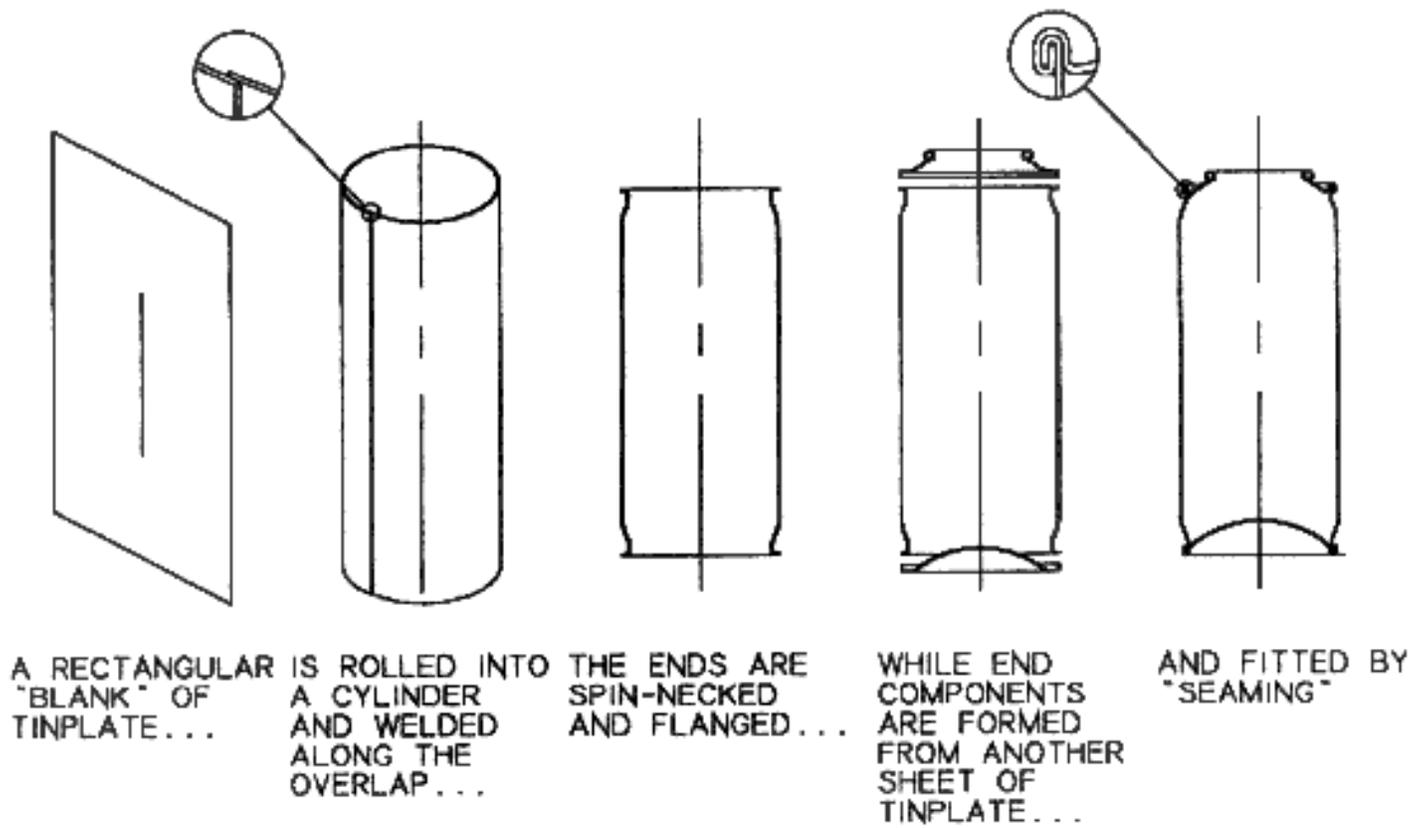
MANUFACTURING PROCESS FOR TINPLATE AEROSOL CANS
